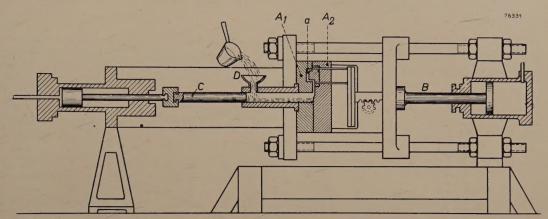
Machine for pressure die casting. A_1 and A_2 are the two parts of the steel die. The moving part is pressed against the fixed part by the hydraulically moved piston B, while the piston C forces the liquid metal, poured into funnel D, into the cavity a of the die. (From "Designing for Alcoa die castings", Alum. Co. of Amer. Pittsburgh 1948.)
